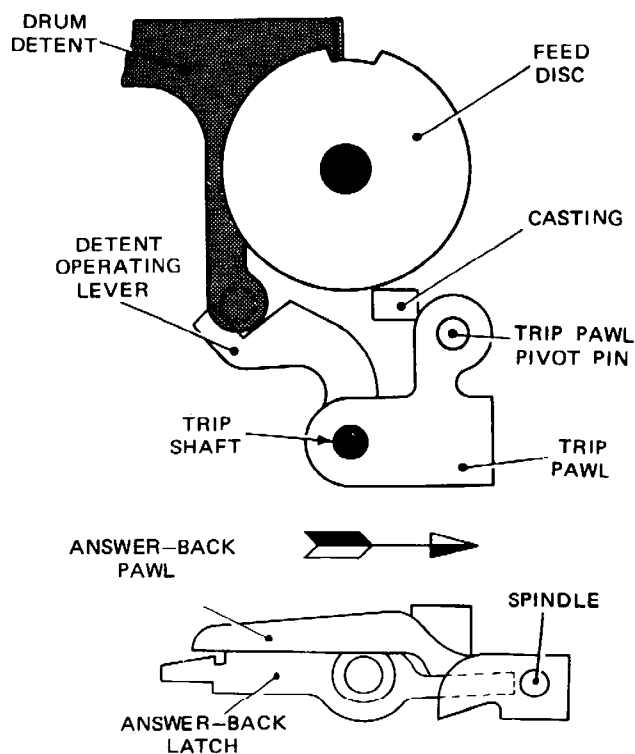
DRUM DETENT/FEED DISC - HORIZONTAL CLEARANCE
